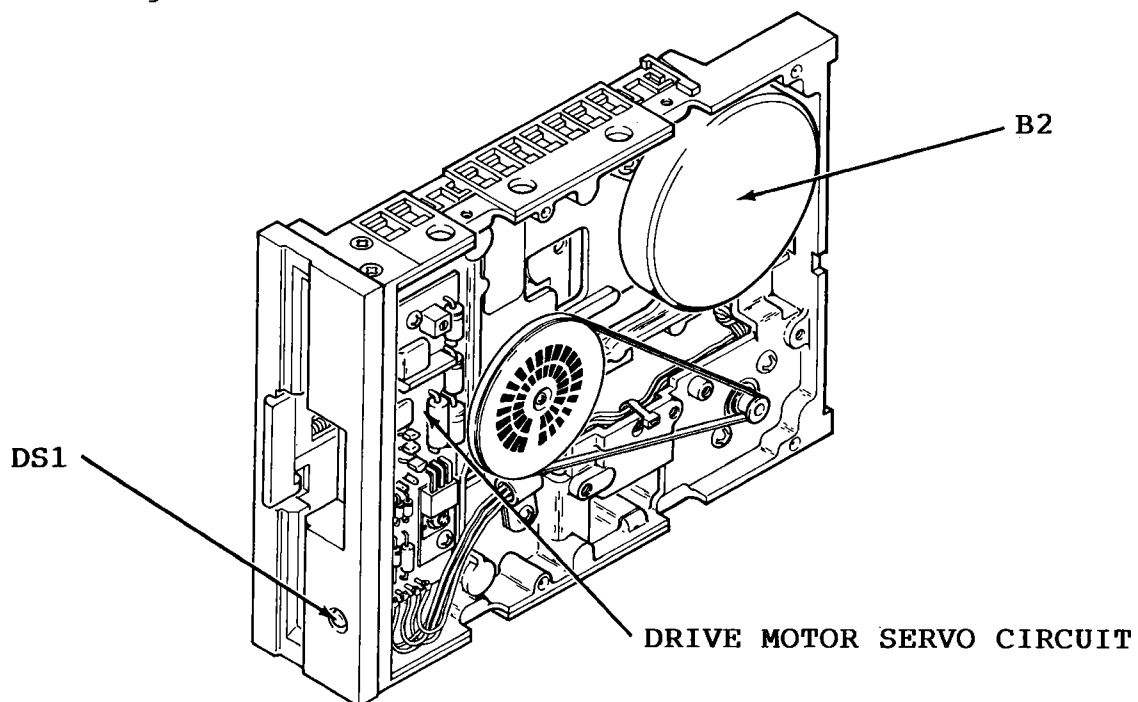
Drive Unit, Parts Layout (Bottom)
